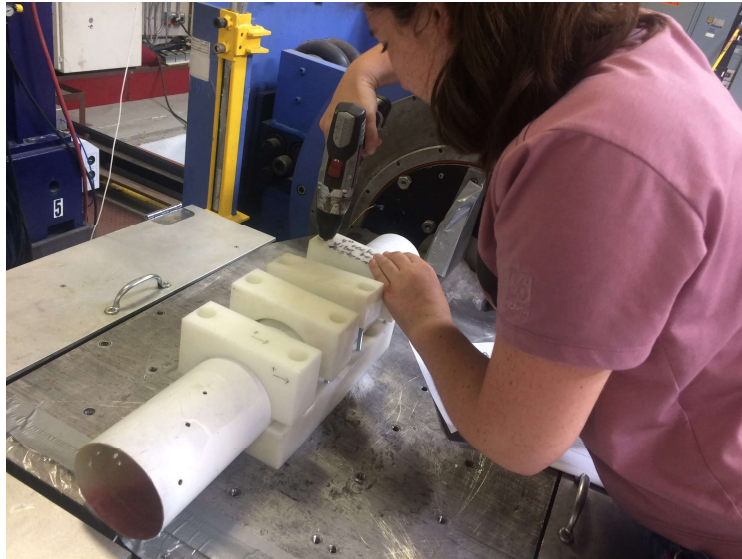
The fully installed jig in the thrust-axis orientation, with top fastening blocks, being tightened
